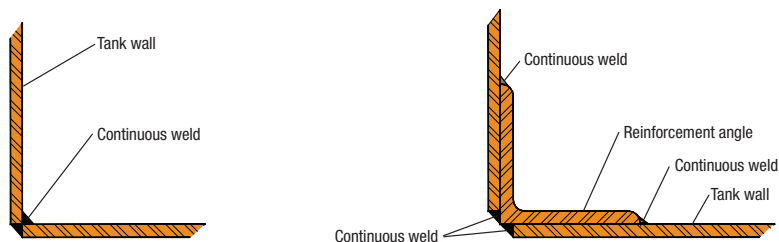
Two corner joint designs are shown here. The preferred method is the use of a reinforcement angle with continuous fillet welds
